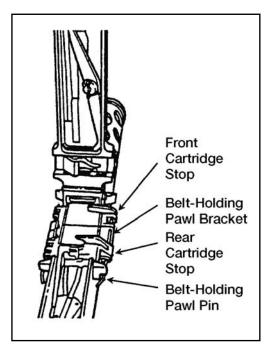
Installation of the rear cartridge stop assembly and front cartridge stop
